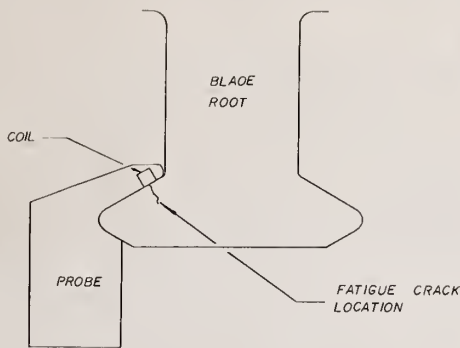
Fatigue crack inspection of fan blade roots.
